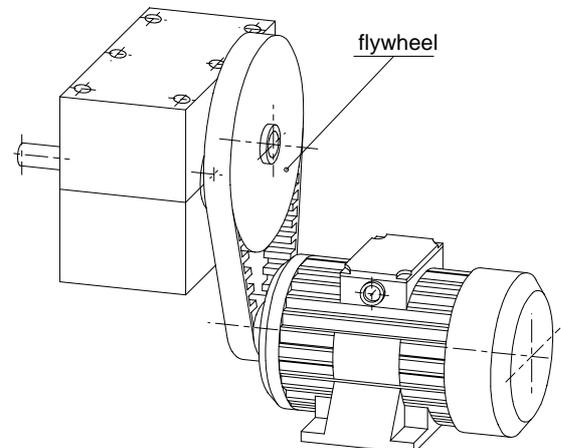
Motor drive using spring drive; the flywheel ensures that the input shaft rotates at a constant speed.
